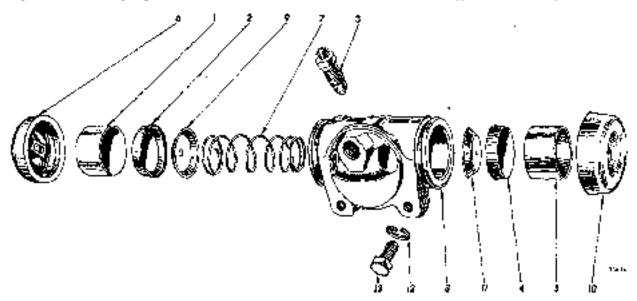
Brake Wheat Cylinder (Disassembled View) (1942 Model, Typical of 1936-41 Models)
